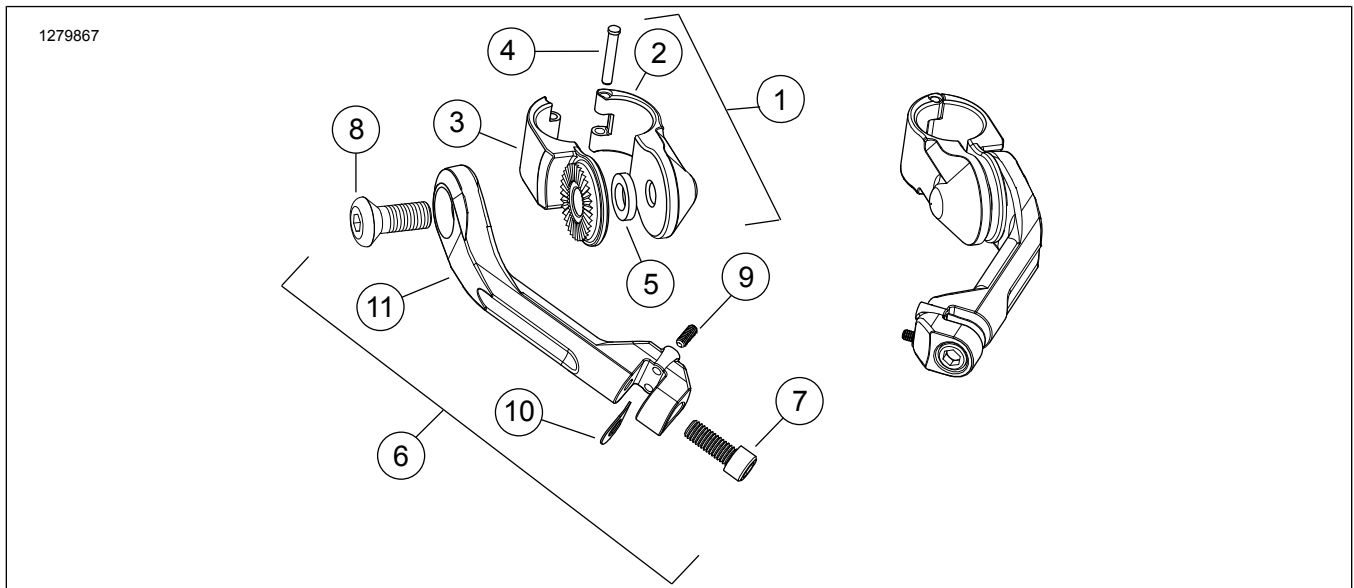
Kit Contents: Engine Guard Footpeg Mounting Kit
